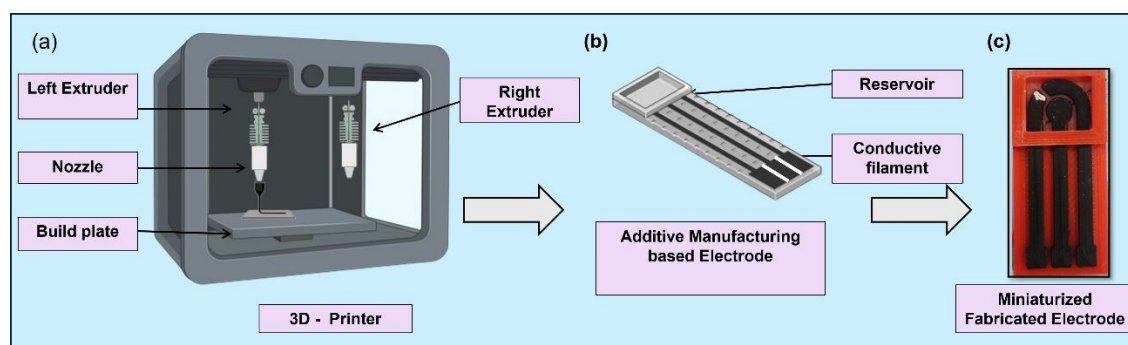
(a) The fabrication of an electrochemical sensor using carbon conductive electrodes using the 3D printing (BCN 3D Printer), (b) Printed electrode with the sample reservoir and conductive electrodes using additive manufacturing, and (c) the final fabricated miniaturized electrodes.
